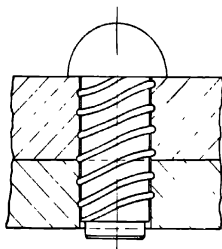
A hammer drive screw suitable for fastening together light alloy sheet parts
